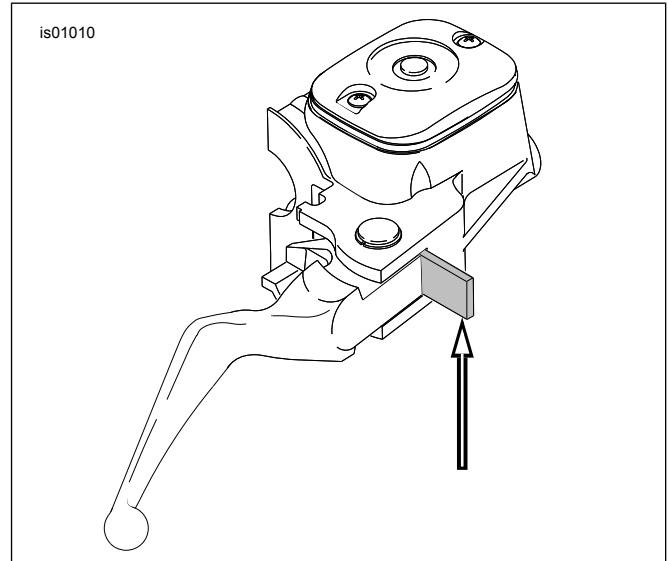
5/32 in. (4 mm) Cardboard Insert
